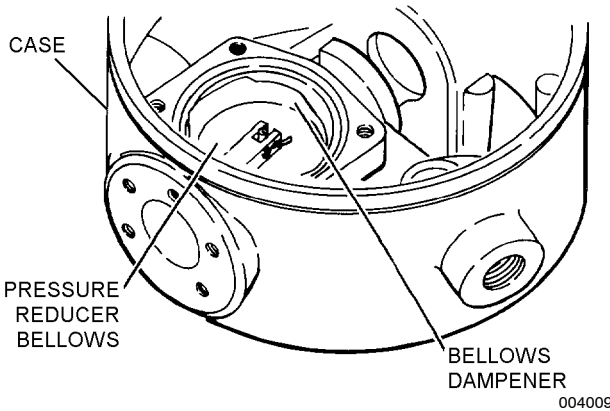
Positioning of Bellows Dampener in Pressure Reducer Assembly
